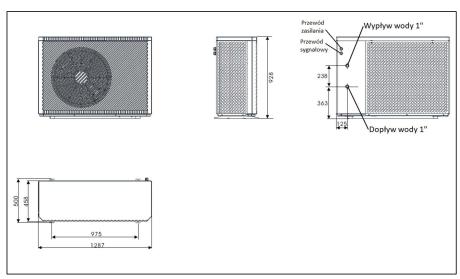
Overall dimensions of the Hero Premium Q15 heat pump
